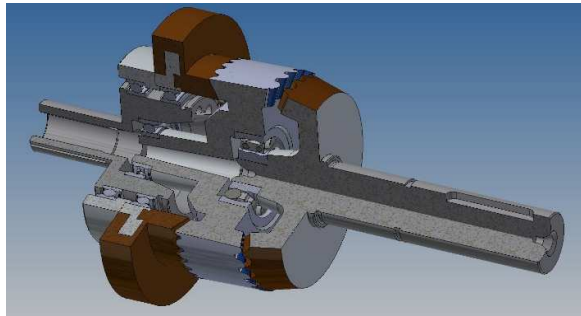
3D model of precessional gear reducer with a tooth-to-tooth engagement type A^D_{CX-CV}
